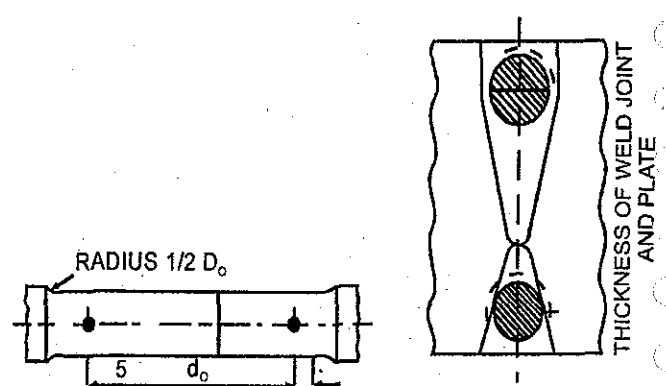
ALL-WELD METAL TEST SPECIMEN
